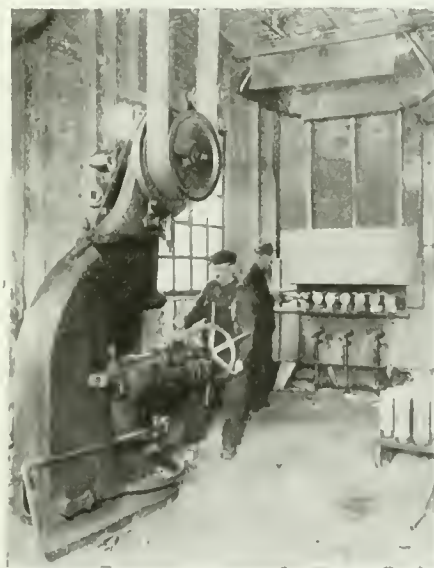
BEAUDRY POWER HAMMER AND FRANKFORT OIL-FIRED FURNACE HEATING AND FORGING THE SHELL NOSES.
